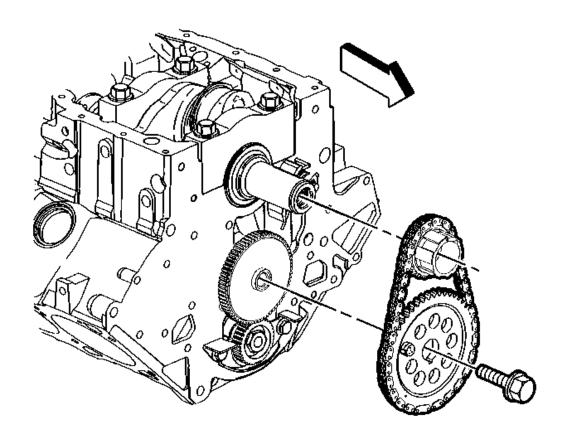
Timing Chain, Crankshaft Sprocket & Camshaft Sprocket (L26) Courtesy of GENERAL MOTORS CORP.
